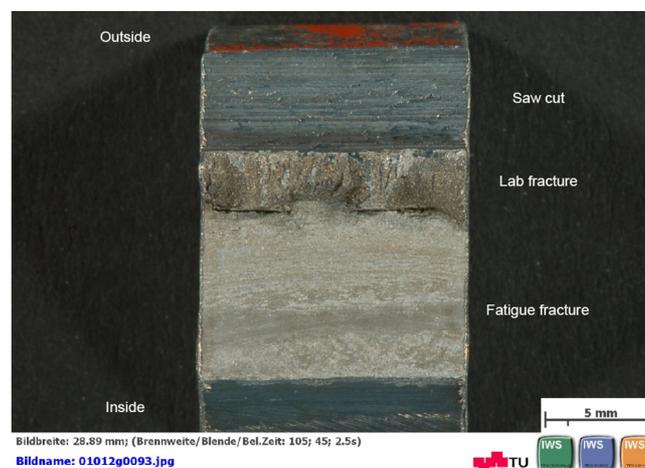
Surface of forced opened fatigue crack after chemical removal of the corrosive layer
